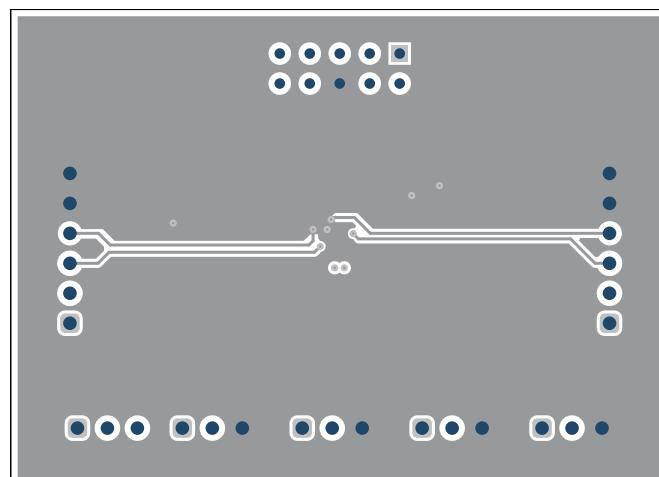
TPS6286x0EVM PCB - Bottom Layer (Top View)
